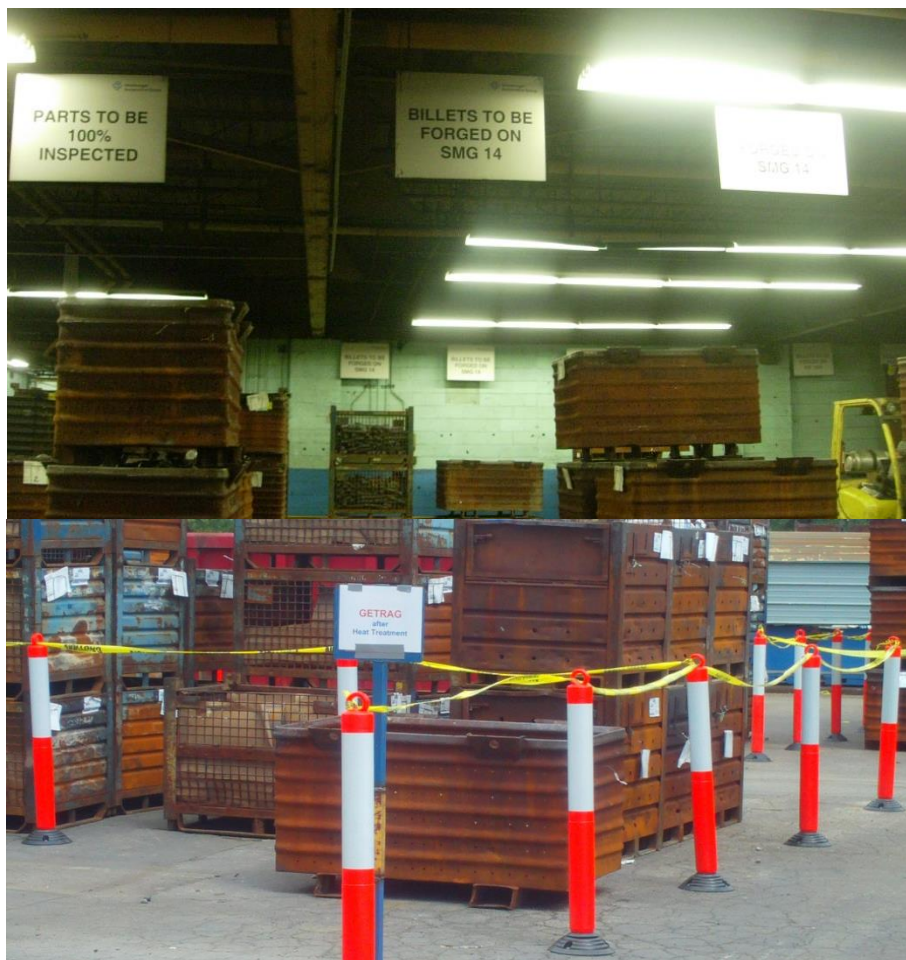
Label Stand at Outside Storage Area and New Static Label Hung
